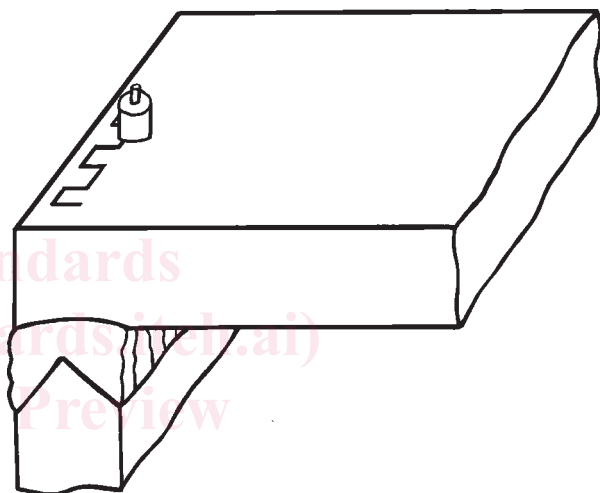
Technique 9, for Inspecting the Fusion Zone of Double-Vee Corner Welds
